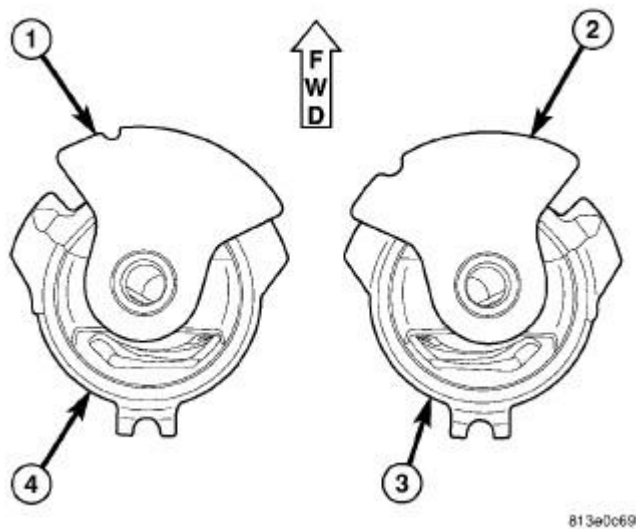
FRONT BUSHINGS - LEFT AND RIGHT
